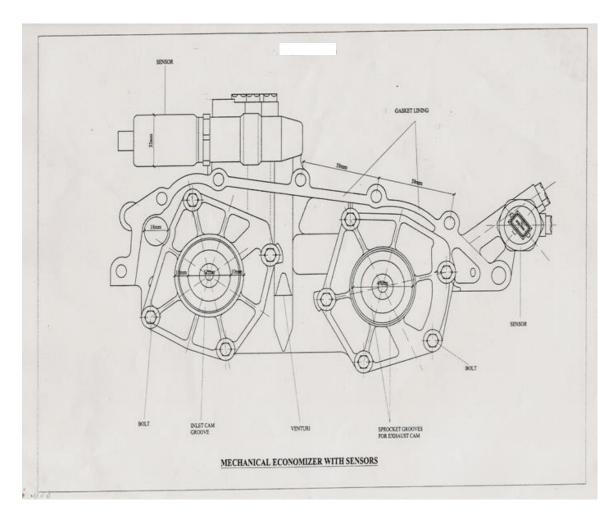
Mechanical economizer with sensors for BMW (cross section)
